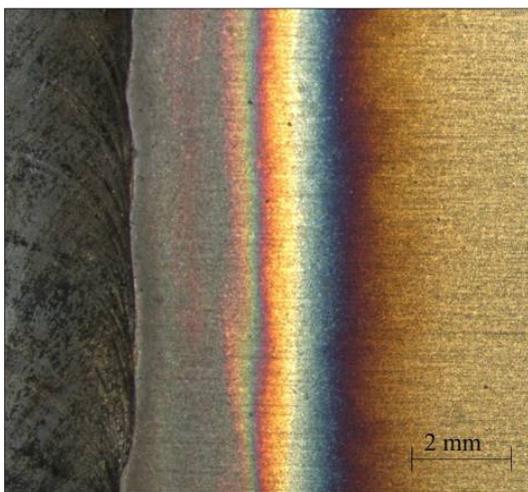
Heat tints on samples prepared for pitting corrosion testing according to ASTM G48.
